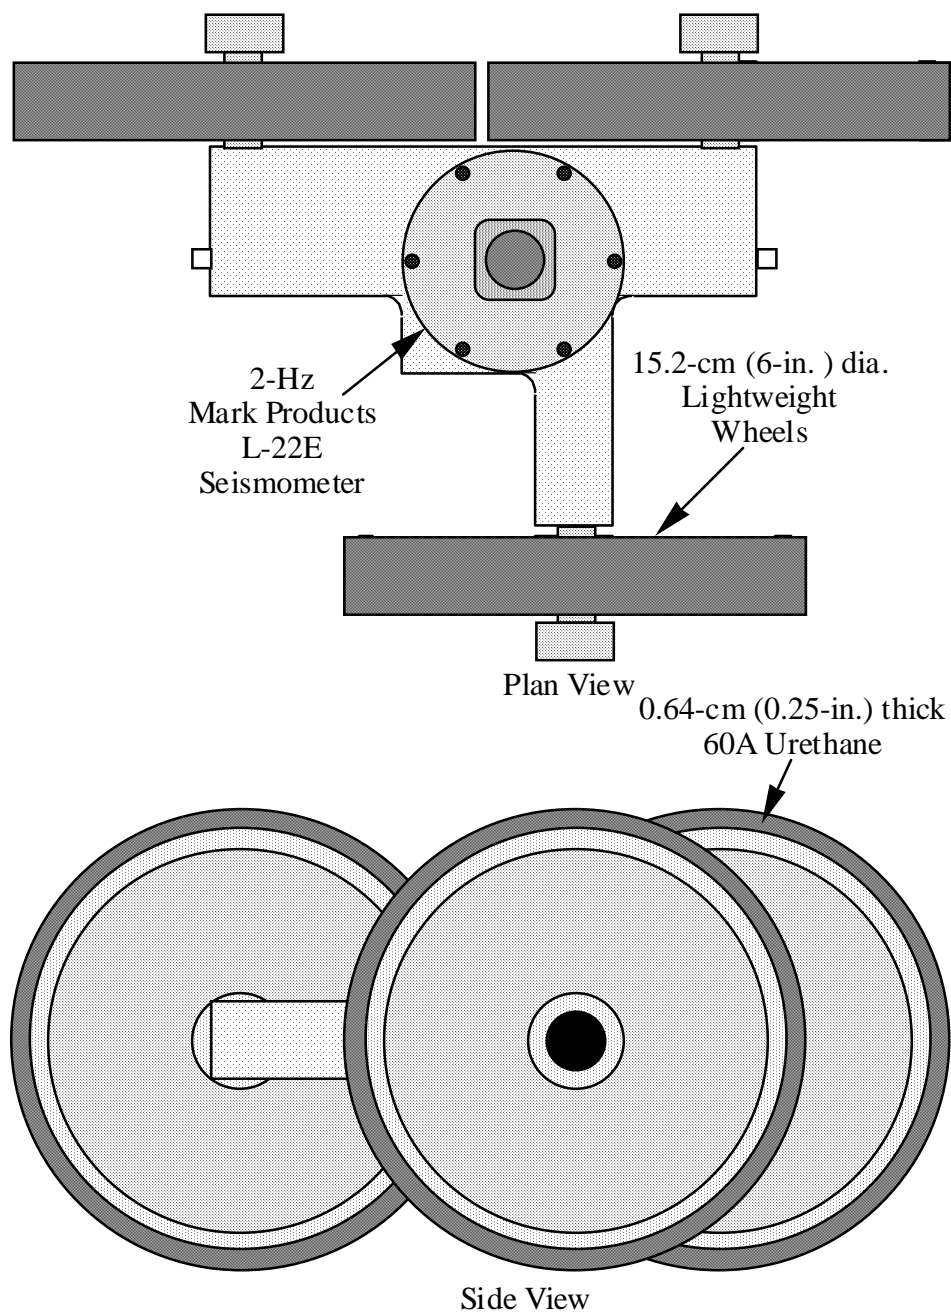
Plan and Side Views of Second-Generation RDD Rolling Sensor
